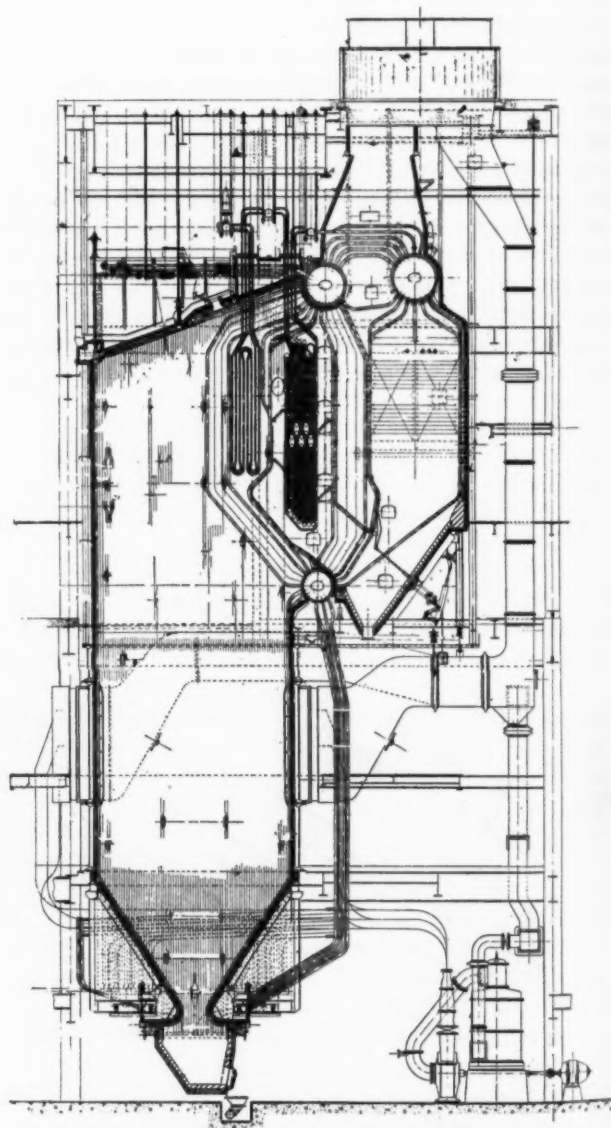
Cross-section of steam generating unit in which furnace, water walls, boiler, drums, superheater and economizer are carried from overhead structural steel
